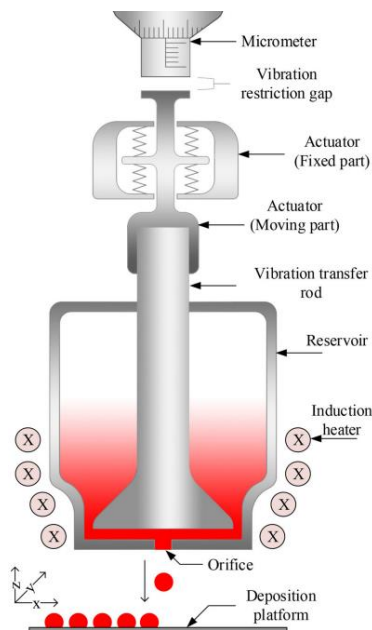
Schematic view of an impact-driven DoD generator. [80]
